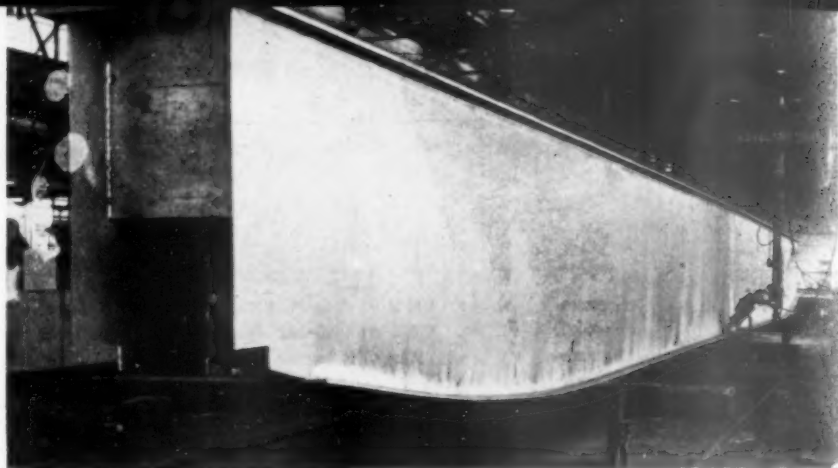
The Unamatic Process is especially applicable to long seam welding. Shown here is an installation with a gantry crane for fillet welding a long girder box. Two heads are operated simultaneously. Work hides one head.
